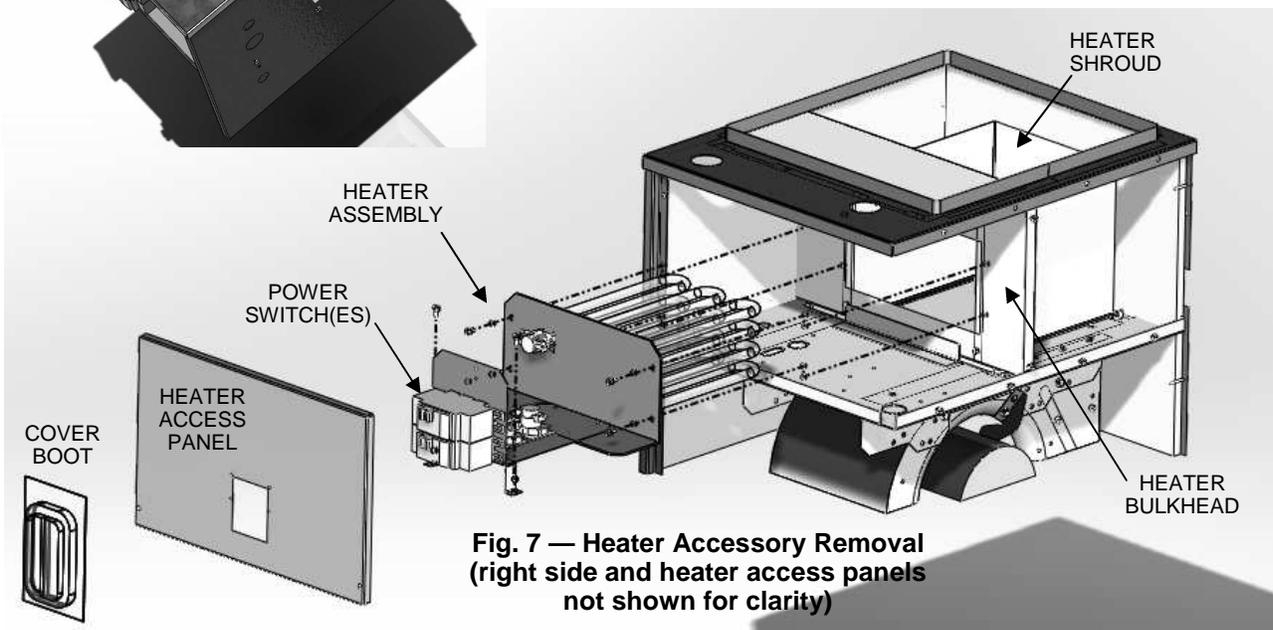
Heater Accessory Removal (right side and heater access panels not shown for clarity)
